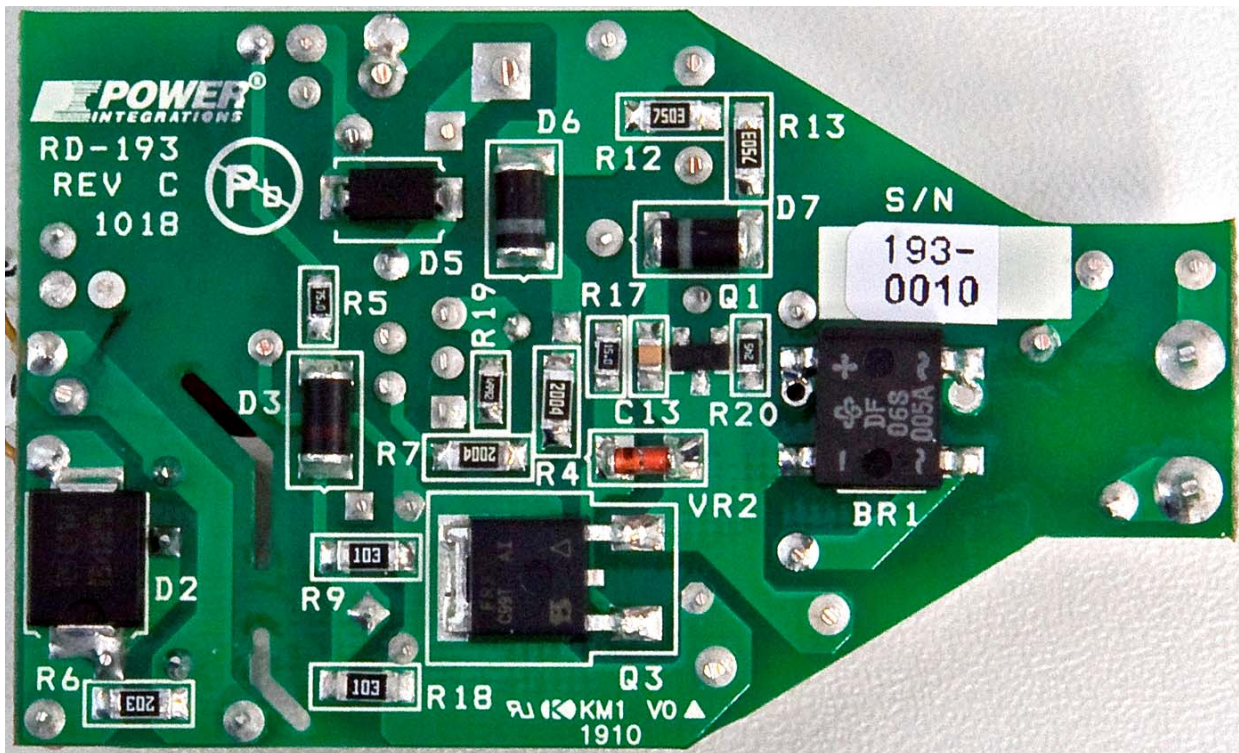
Populated Circuit Board Photograph (Bottom View).
